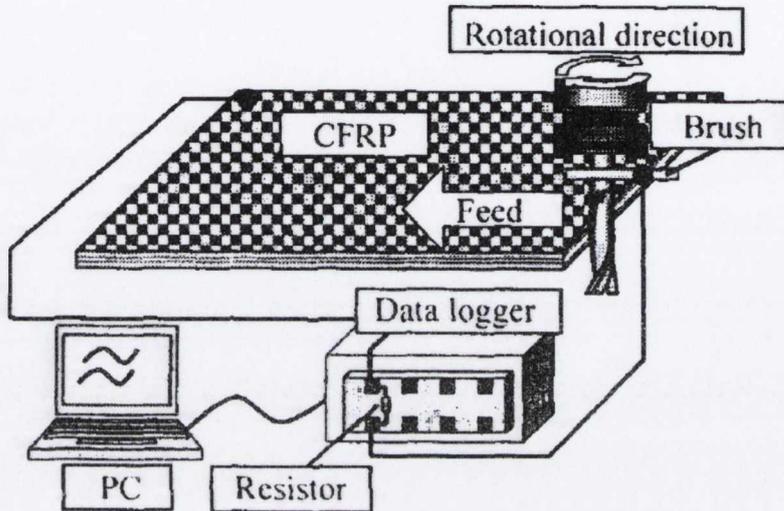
Tool-workpiece method used by Sasahara *et al.* [100]
